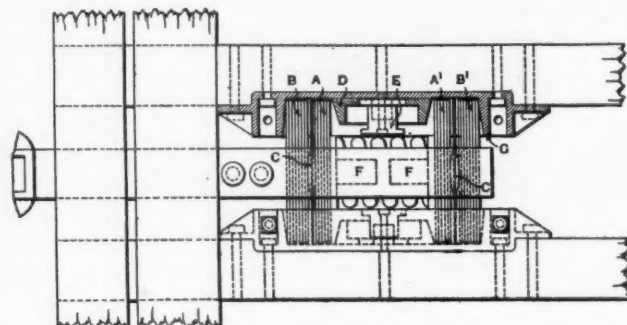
DETAILS OF THE WAUGH DRAFT GEAR, SHOWING ALL PARTS AT REST.
